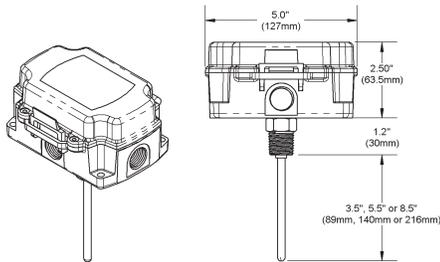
Double Threaded Immersion Sensor in a BAPI-Box (BB) Enclosure
